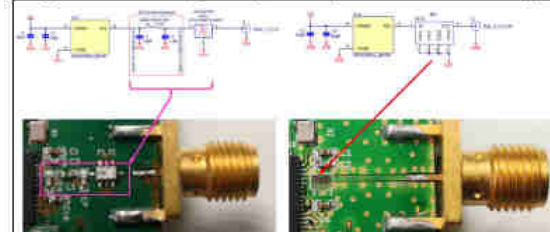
Detail of PCB layout for the SMPS part (UFQFPN48 left, VFQFPN68 right)
